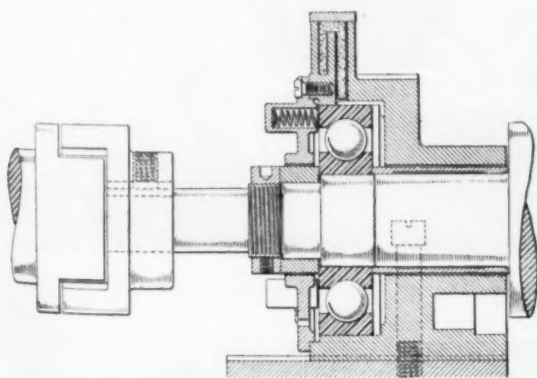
SINGLE BALL BEARING FOR PLANER CUTTER HEAD
